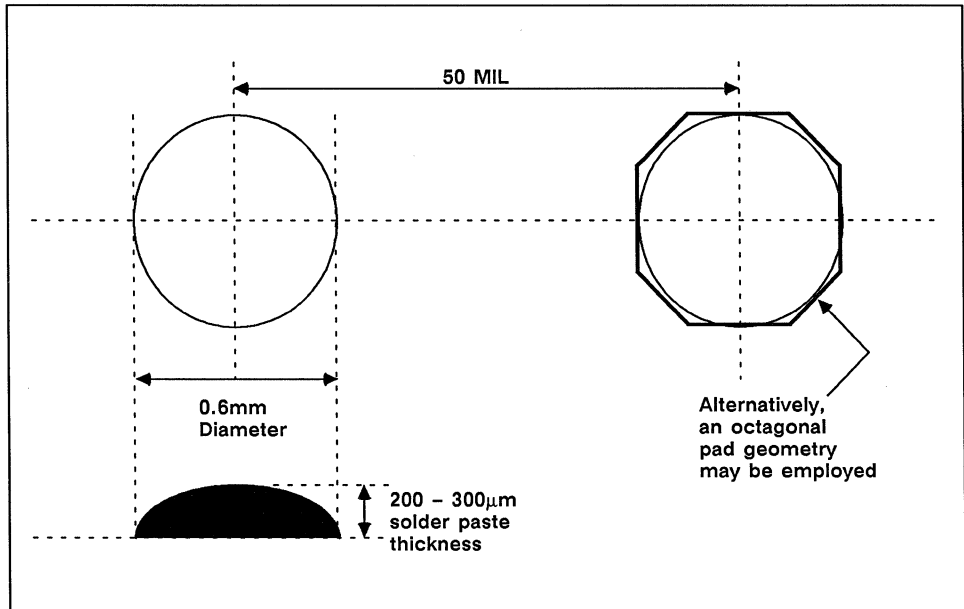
B-17. Solder Pad Design for Surface Mount Pin Grid Arrays
